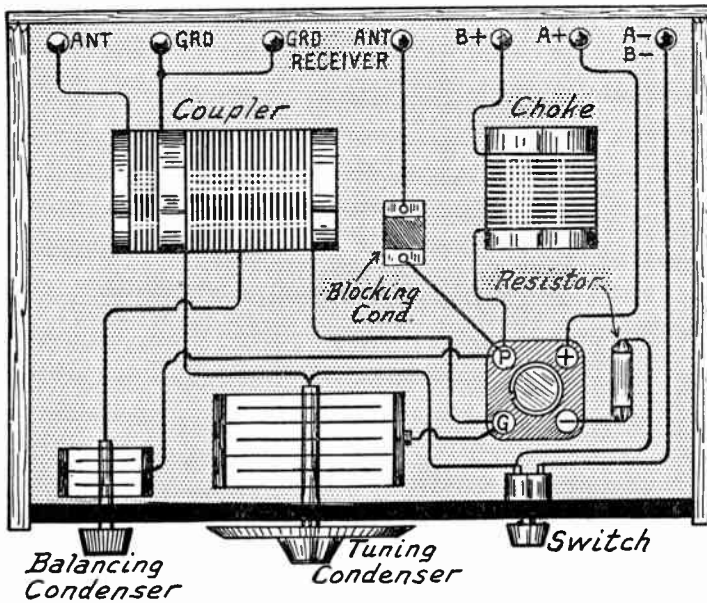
Layout of Added Radio Stage with Balancing Condenser.
